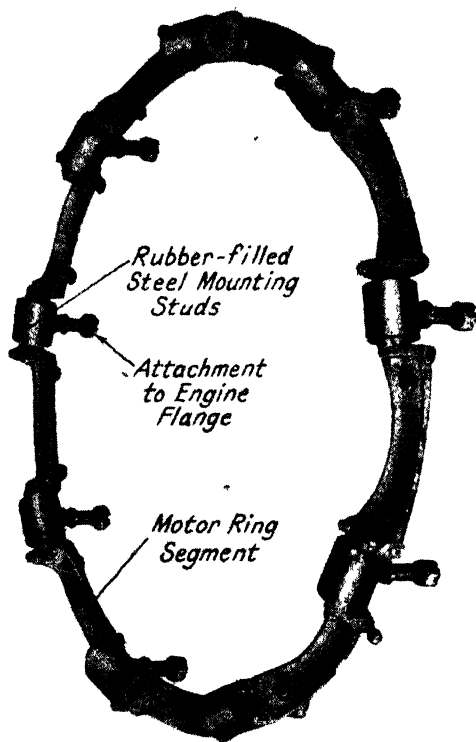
BRISTOL RADIAL ENGINE FLEXIBLE MOUNTING
